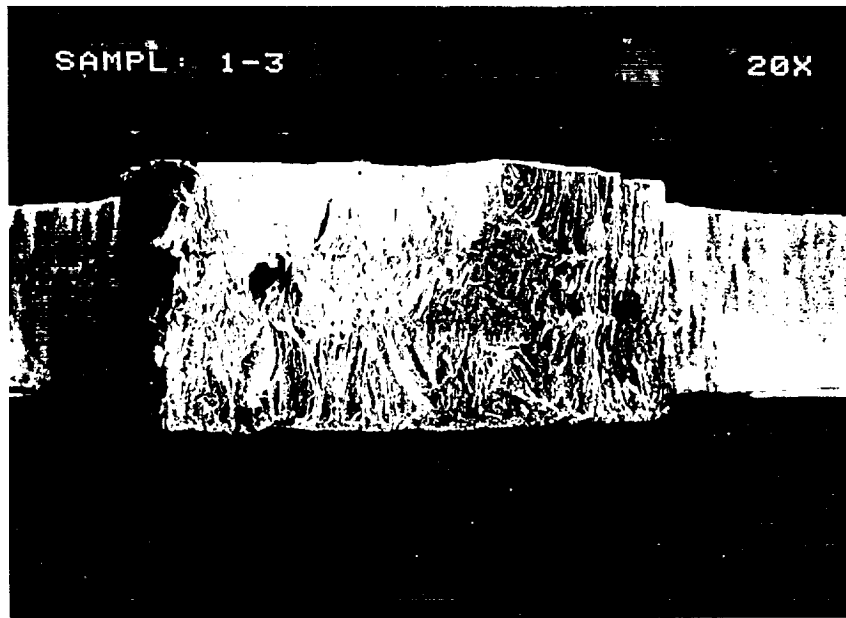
SEM view of fracture in tensile specimen 1-3, 75F, annealed. 20X.
